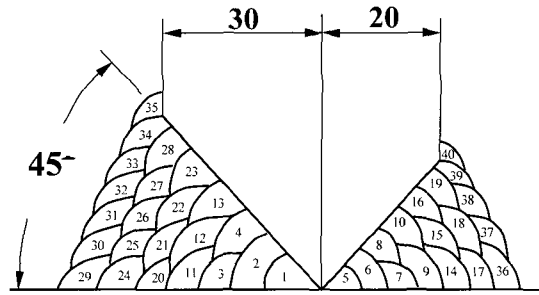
Schematic view of cross-section of T-joint type weldment with 40 welding beads
